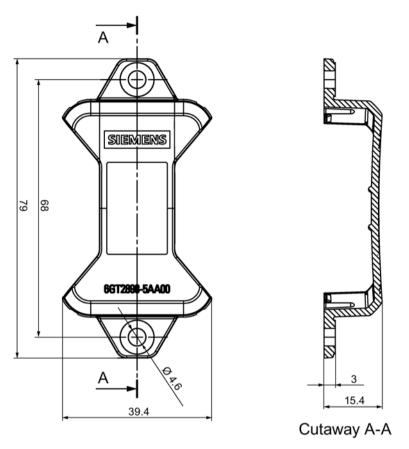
Dimension drawing mounting cover (6GT2898-5AA00) for SIMATIC RF645T
